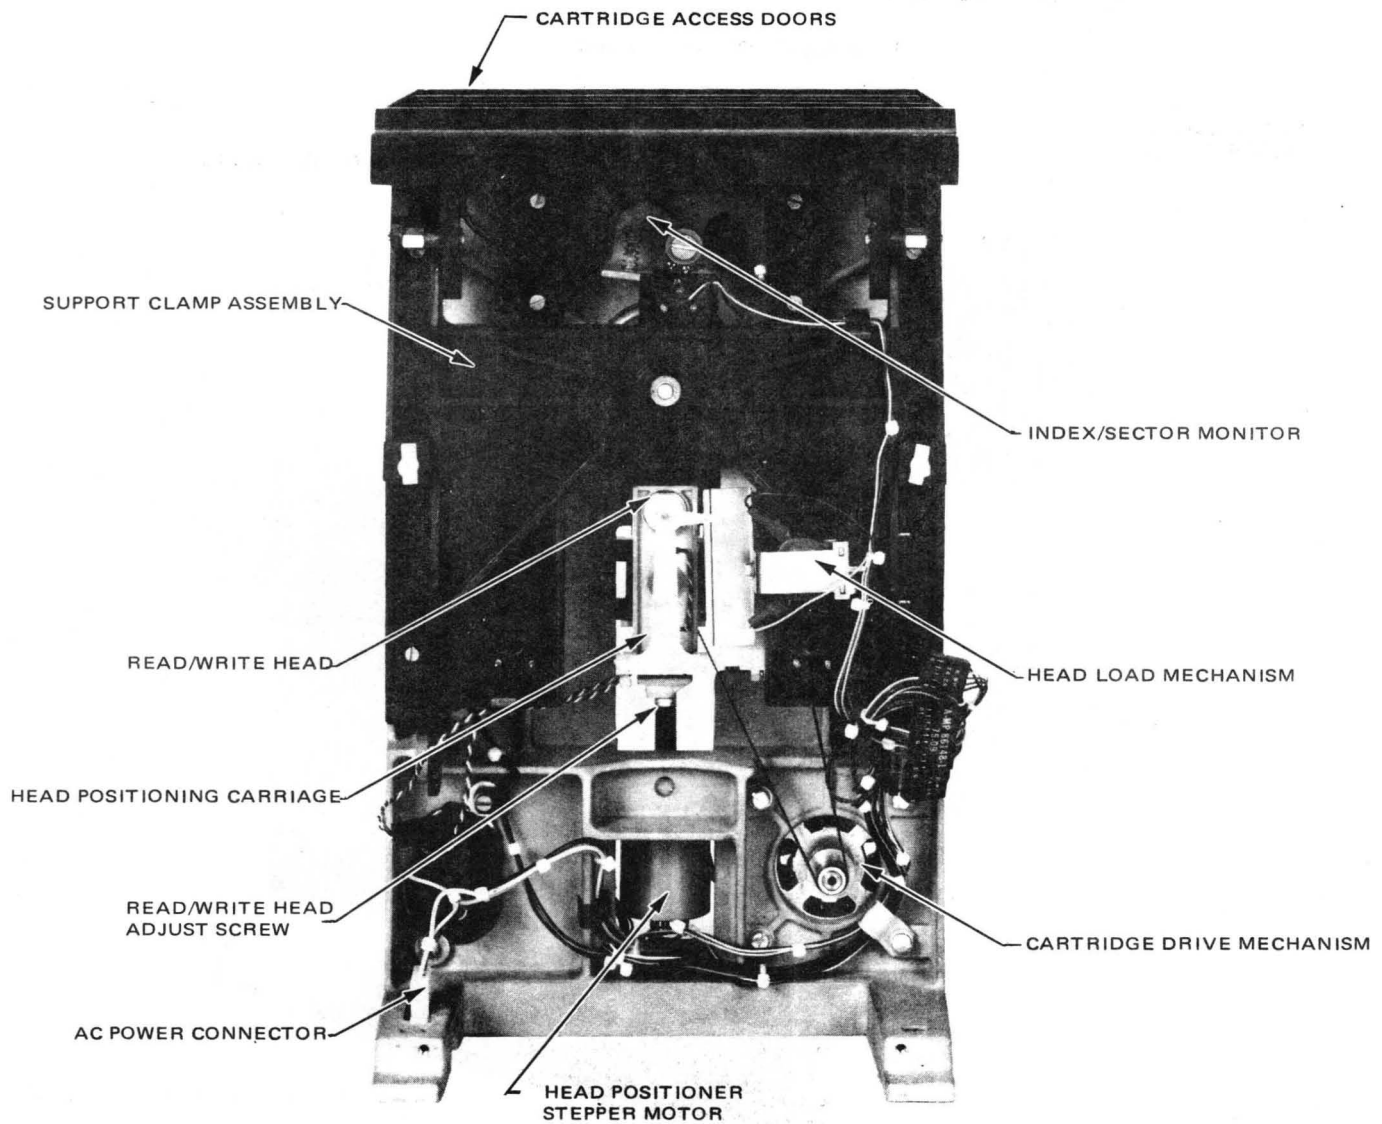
MAJOR ASSEMBLY LOCATIONS
